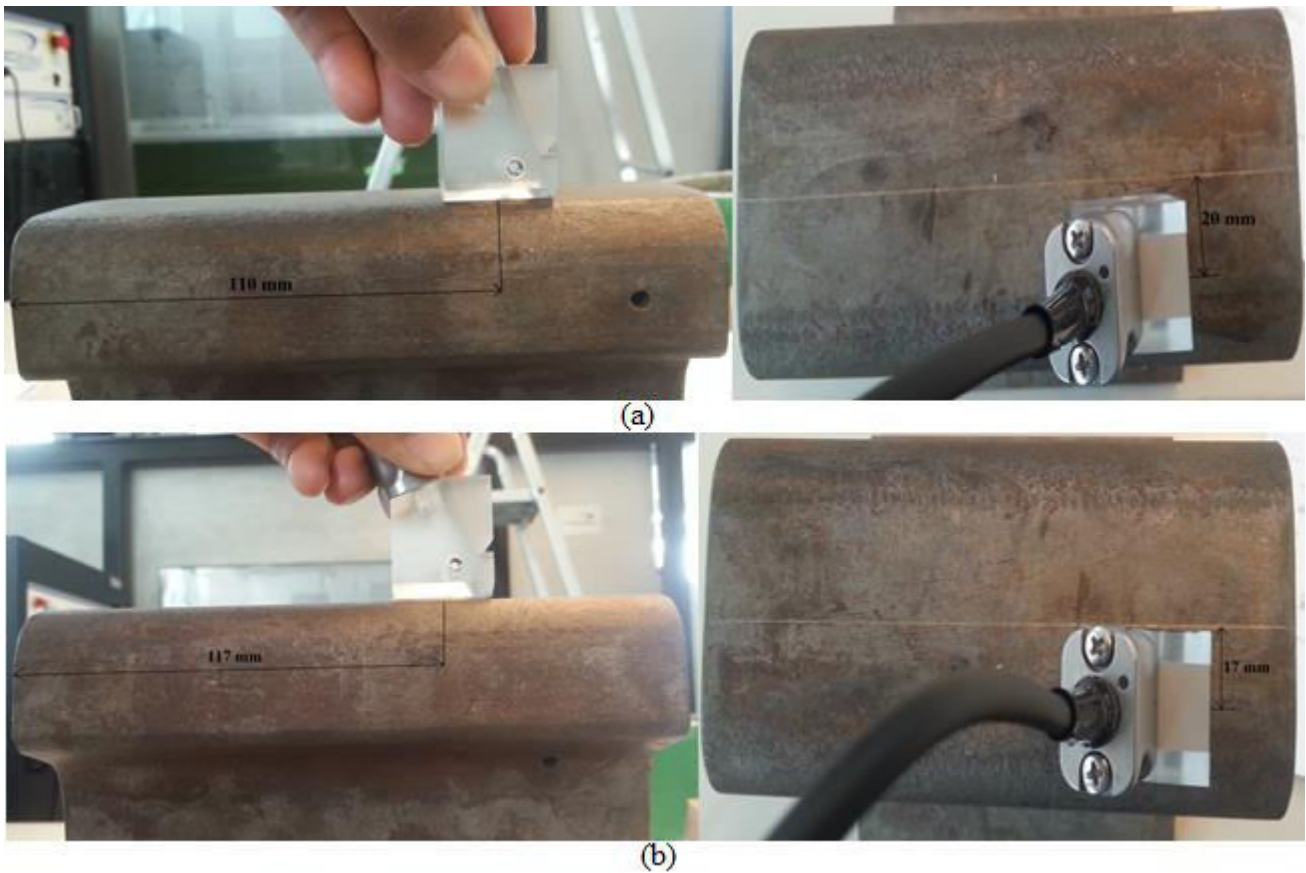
Position of PA2 (Wedge-3) on the test sample (a) for inspecting defect-1
